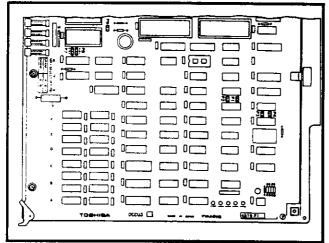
DCCU PCB CONNECTION PLUGS and STRAPPING
